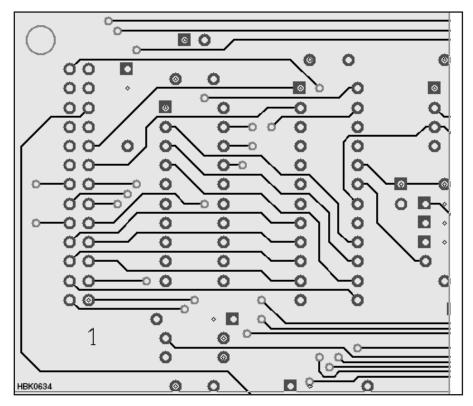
This example shows traces on the side of the PCB for horizontal routing. Traces are routed between pins of ICs. The smaller pads are for vias to a different layer of the PCB.
